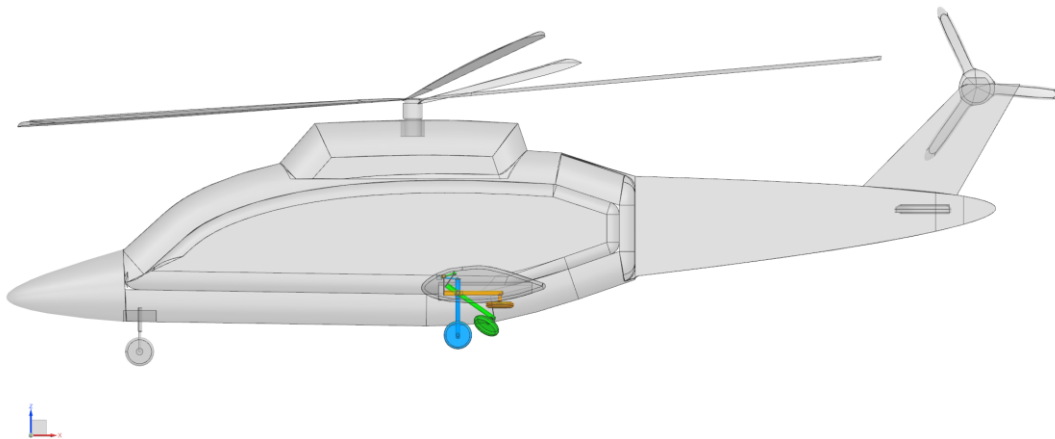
Helicopter CAD Model with SSRR Mechanism, Side View
